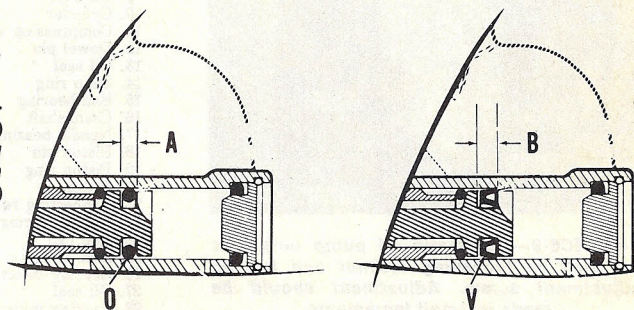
Some early "W" series carburetors have a seal cup which must be installed 5/64-inch inside primer bore as shown above.
